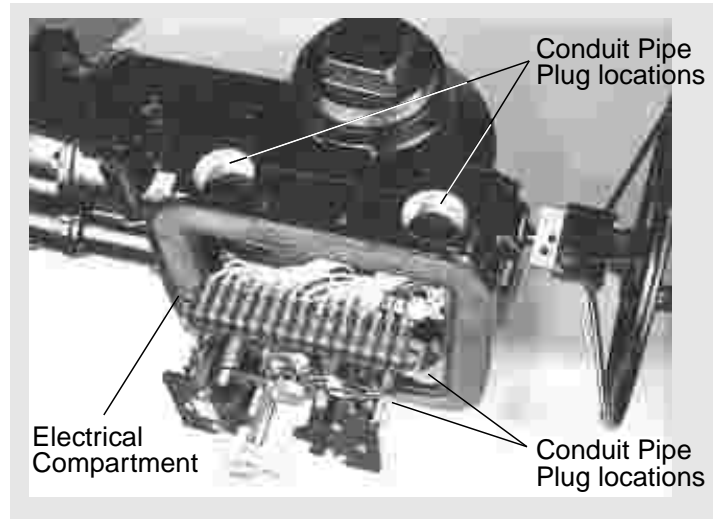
Electrical Compartment and Conduit Pipe Plug openings
